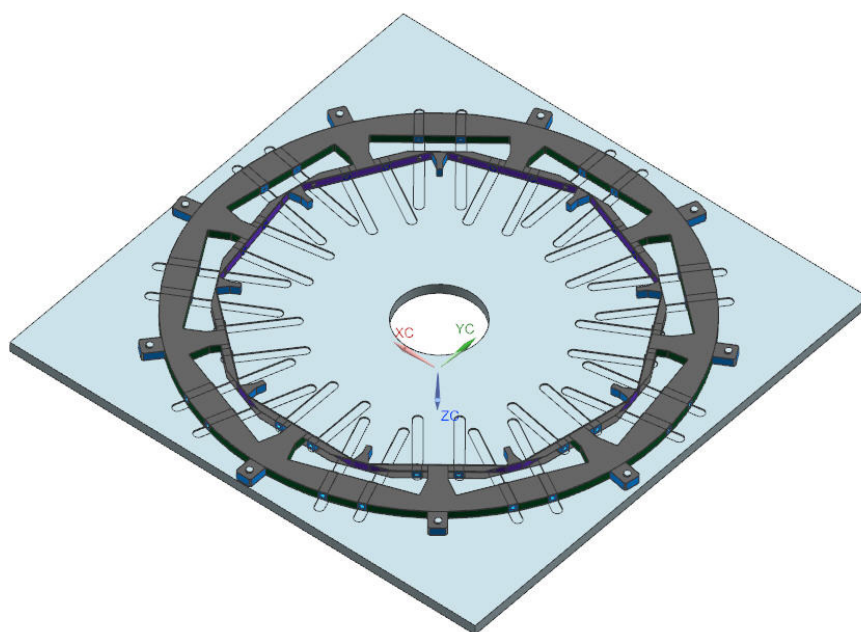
Carbon fiber/foam support ring for the inner layer of the flat barrel on it's assembly tooling plate. Locations of the support inserts can be seen in blue. Fingers projecting to the inner radius are "bumpers" to prevent damage during insertion over the pixel support tube.
